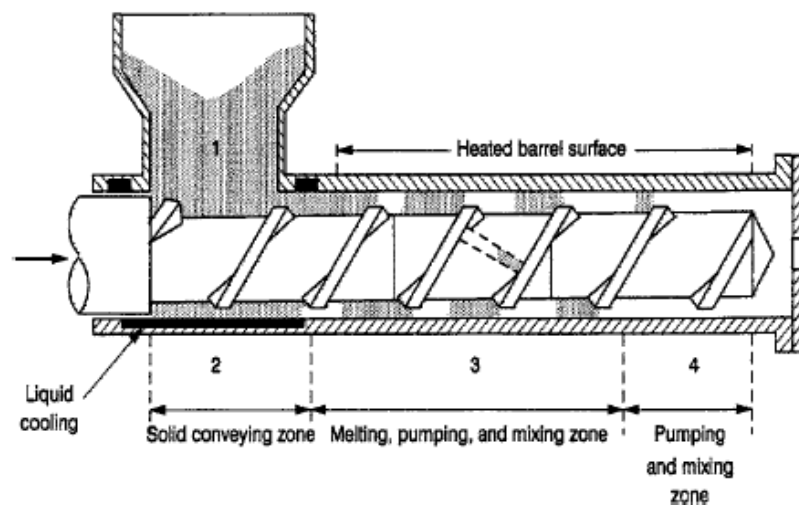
Single-screw plasticating extruder showing the four primary zones: hopper, solids feed, melting, and pumping [33]
